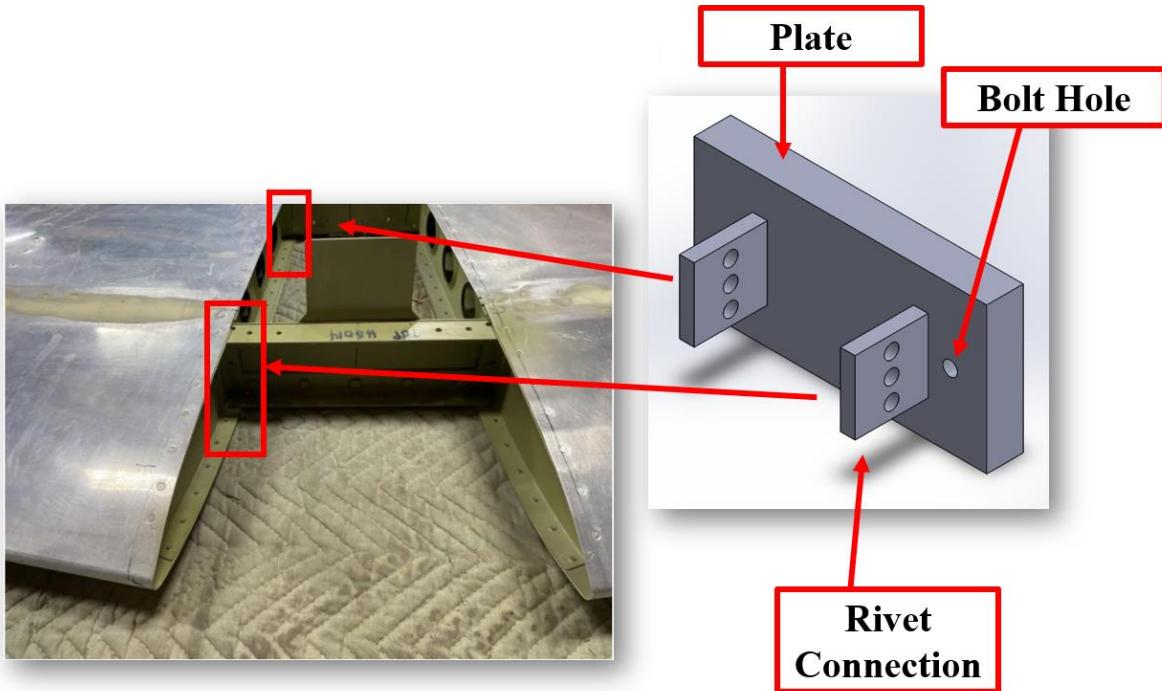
Plate that will connect to the main portion of the test fixture and the horizontal stabilizer.
